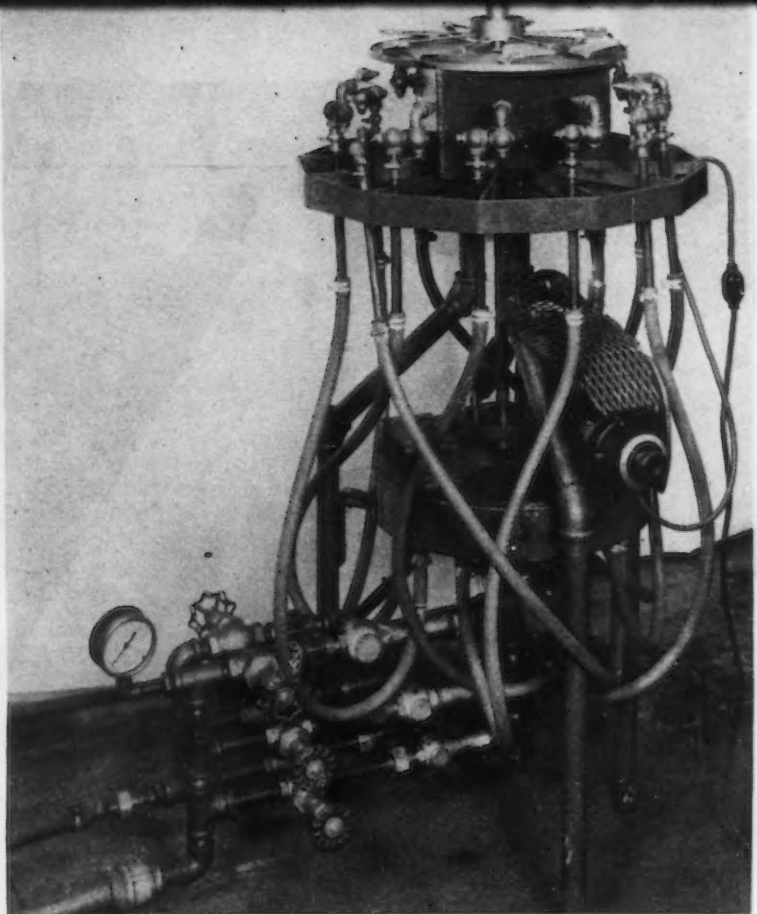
Assembled machine as it appears without the quench tank and with the type of dial employed whereby the circular plate is fixed and parts above it rotate.
